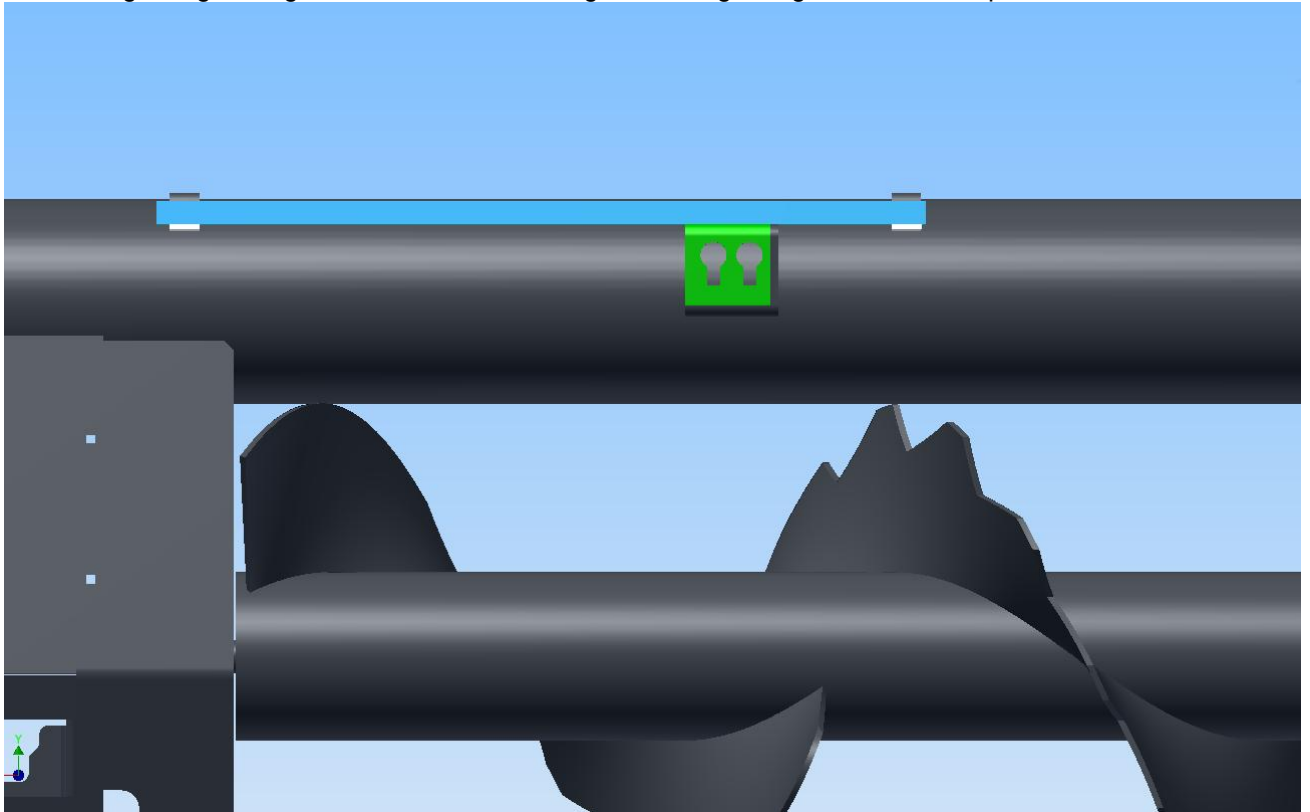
STRAIGHT EDGE ON LINES FOR TOP OF THE MOUNT BRACKET
